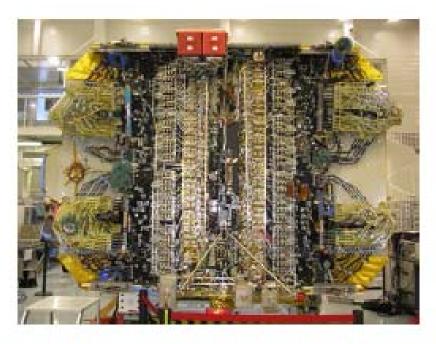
Typical Payload Panel Equipment Layout (Eurostar E3000 Platform) Using Conventional RF Equipment
